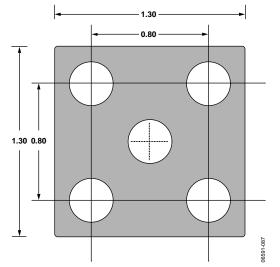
Recommended PCB Thermal Attach Pad Dimensions (mm)
